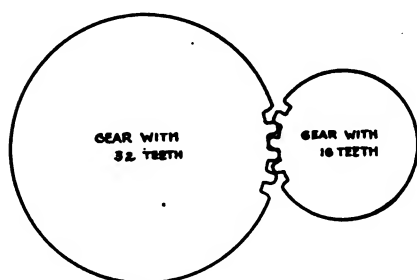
SUPPOSE ONE GEAR HAS 16 TEETH AND THE OTHER 32
